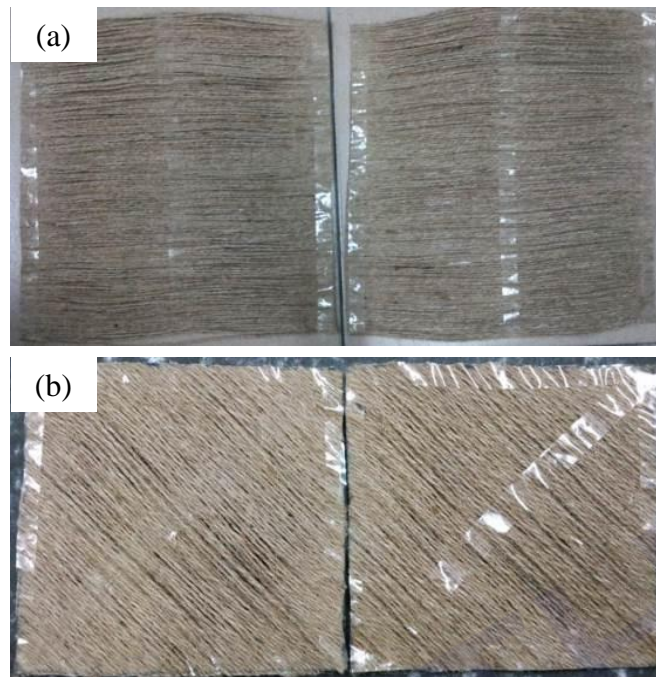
Fabric samples for (a) cross-ply arrangement and (b) angle-ply arrangement
